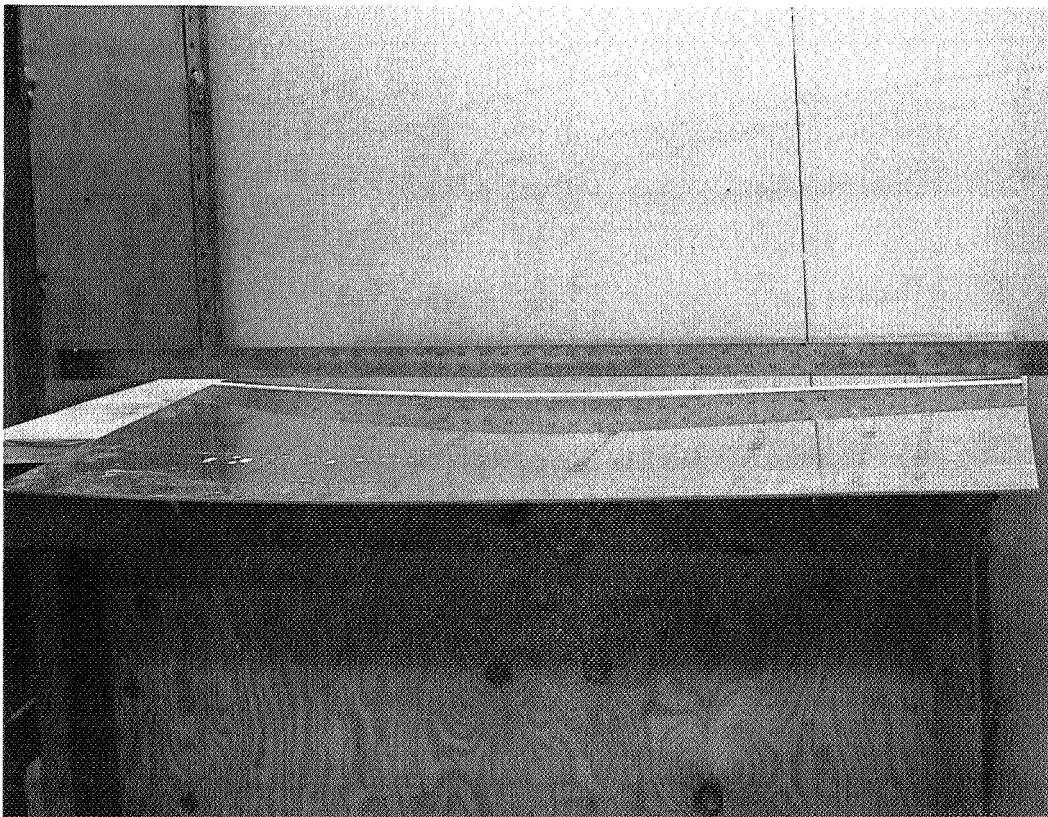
WELD DISTORTION IN 0.125 INCH THICK 2219-T87 ALUMINUM PANEL
